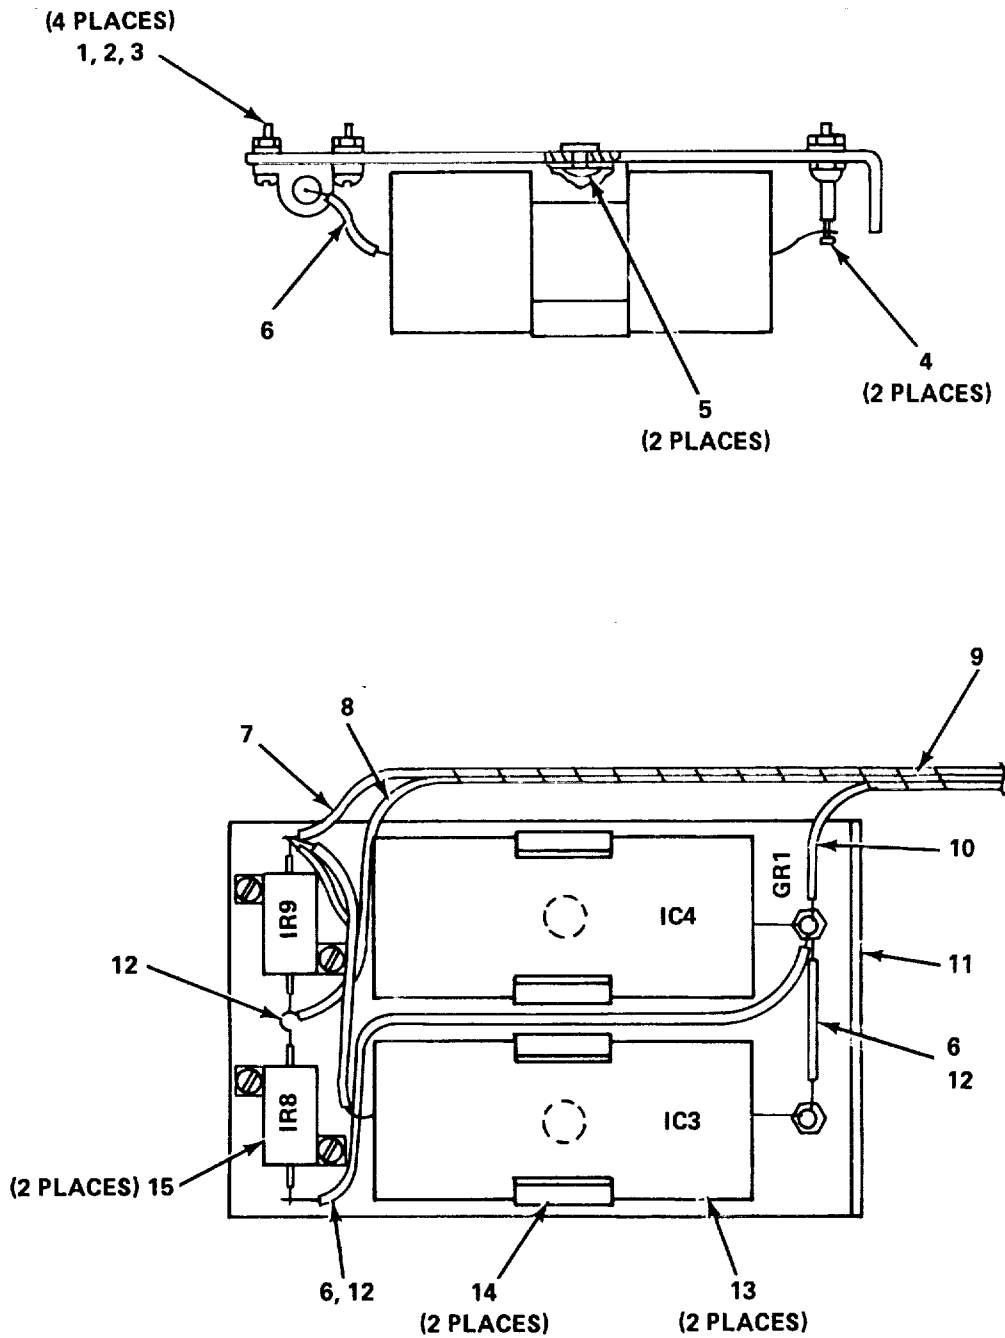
Blinker Assembly, Board No. 1, 1703-1-3019GR1
